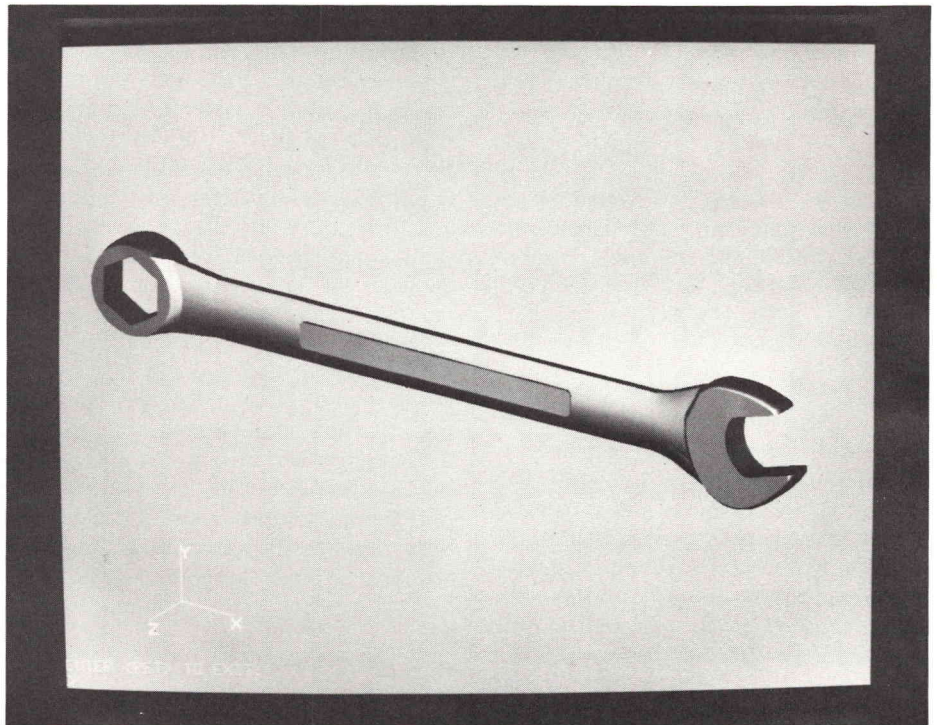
Sample of CAD prototype. (Data courtesy of PDA Engineering.)
